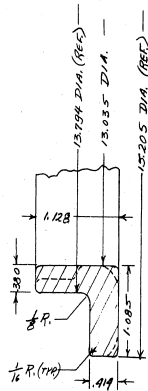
P/N 226964 - Flange Brace, Rear Main Bearing Support Cone Ass'y, Material Ti-A70
